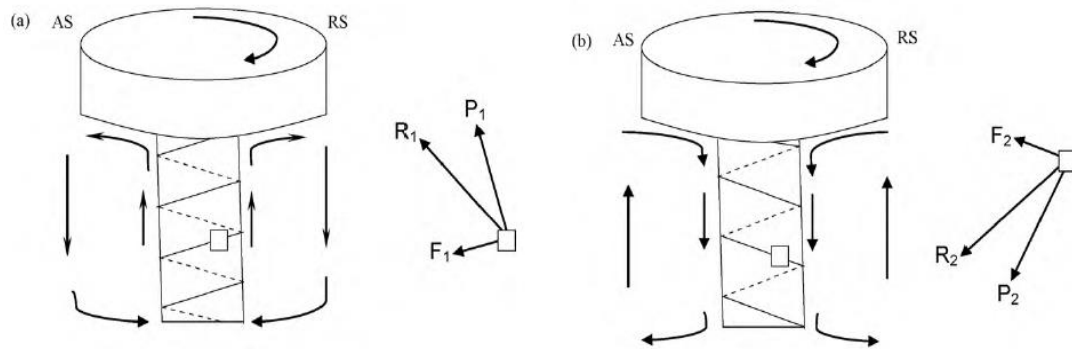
Helical material flow in threaded pin (Courtesy: Chowdhury et al. 2010) (a) Right-hand thread (RHT) and (b) Left-hand thread (LHT) pin tools in the clockwise rotation.
